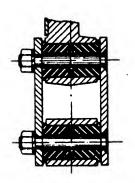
Rubber Bushes FOR SPRING SHACKLES
